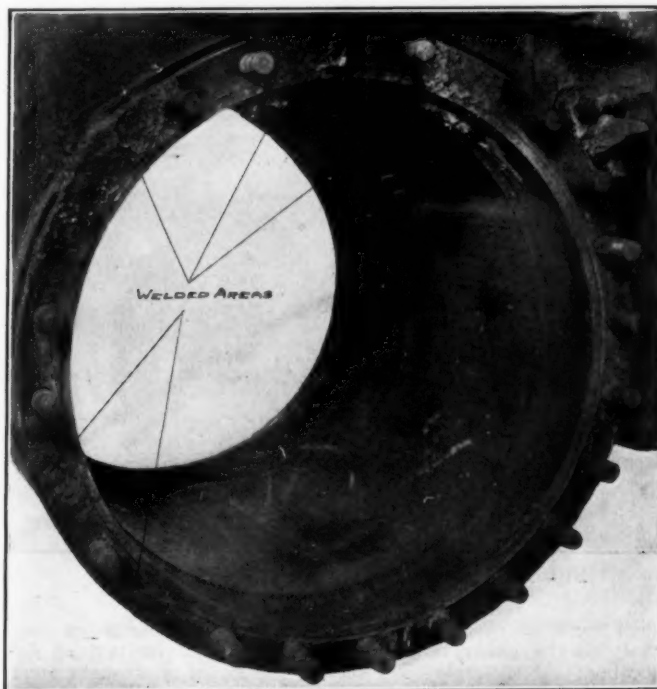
Ruptures in a Locomotive Cylinder Welded By the Gas Method
